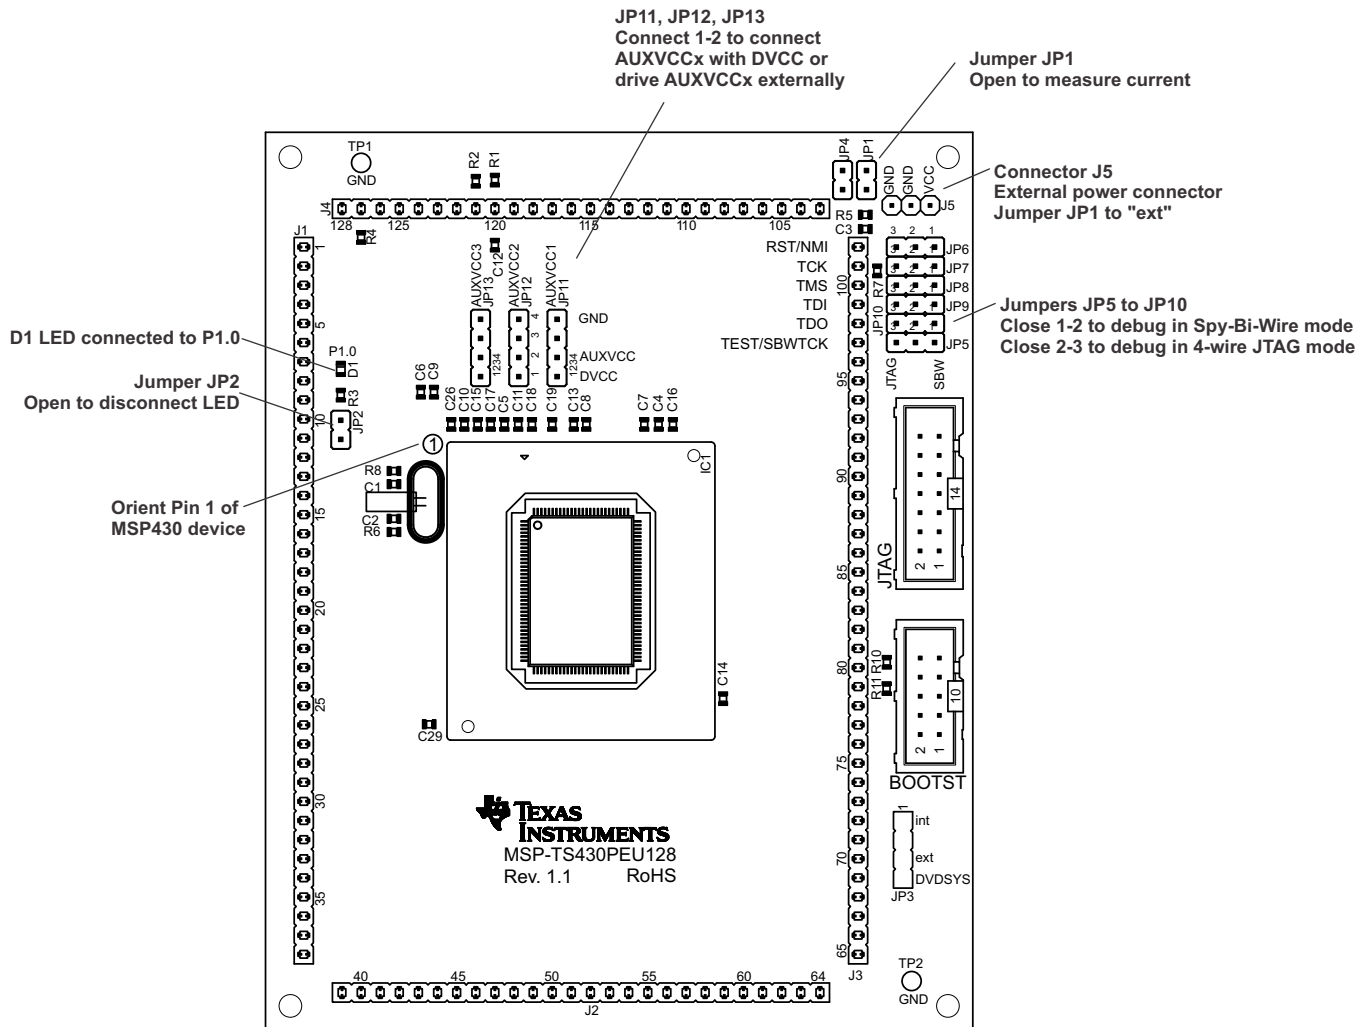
MSP-TS430PEU128 Target Socket Module, PCB
